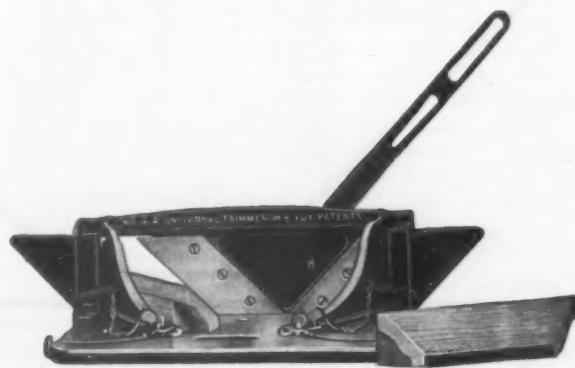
Trimming an Outside Miter on a Crown Molding.
